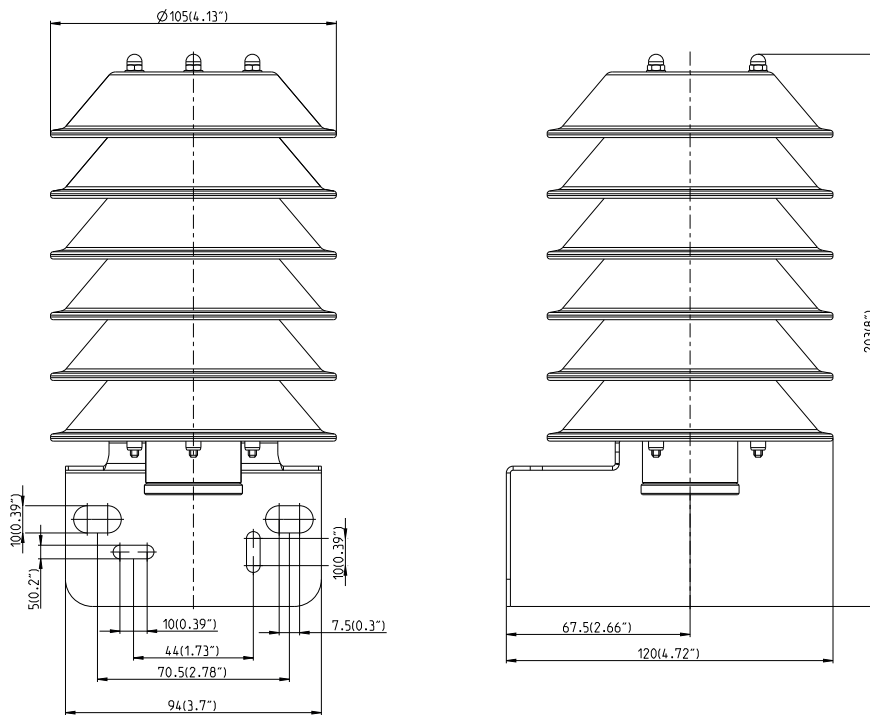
Dimensions of optional radiation shield (accessory HA010510)
